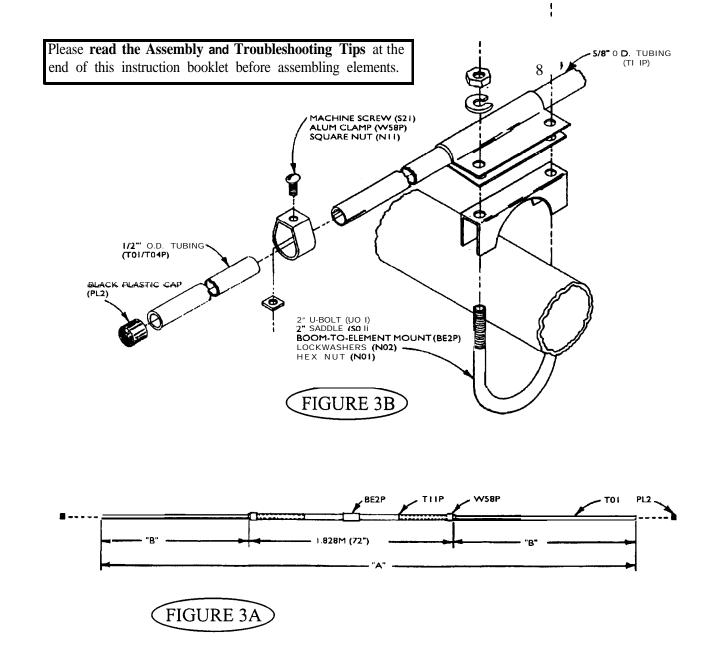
ELEMENT ASSEMBLY AND MOUNTING
